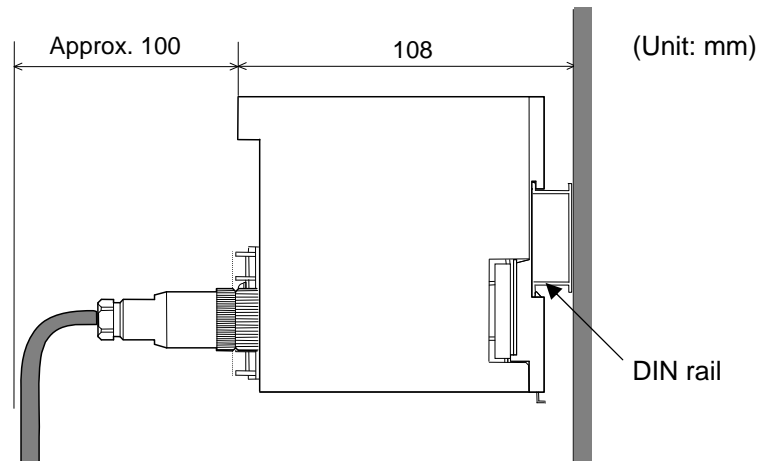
Example of module mounting depth (For micro-style connector)
